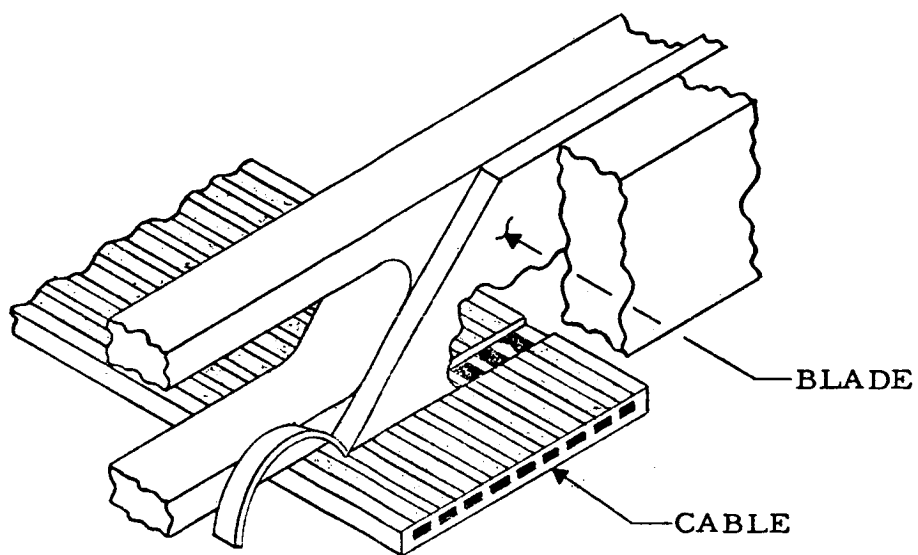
BLADE ACTION OF THE HOBEL STRIPPER
